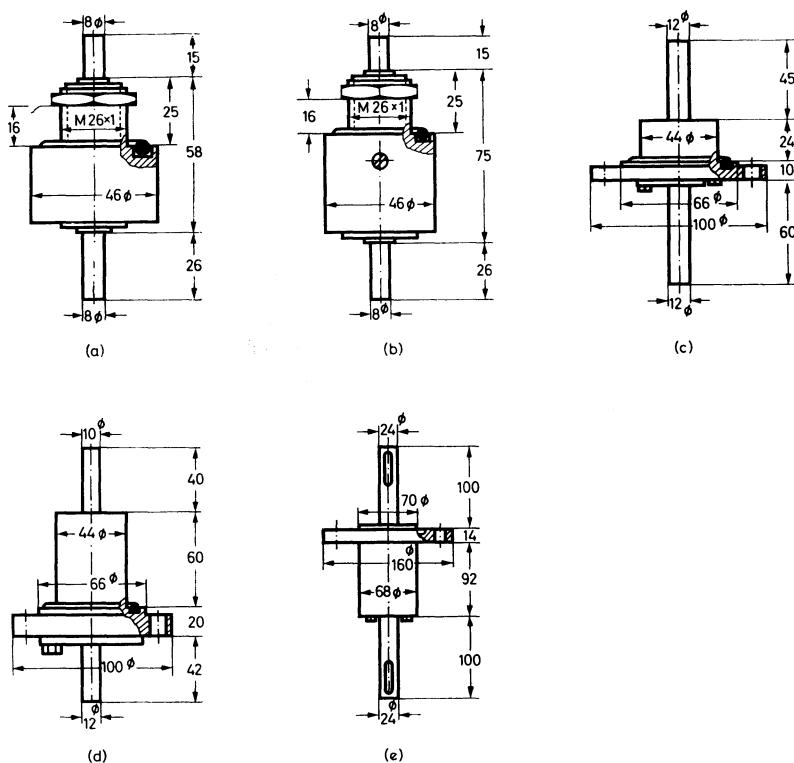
Dimensions of shaft seals supplied by Leybold⁷⁶² (Table 5.7)
